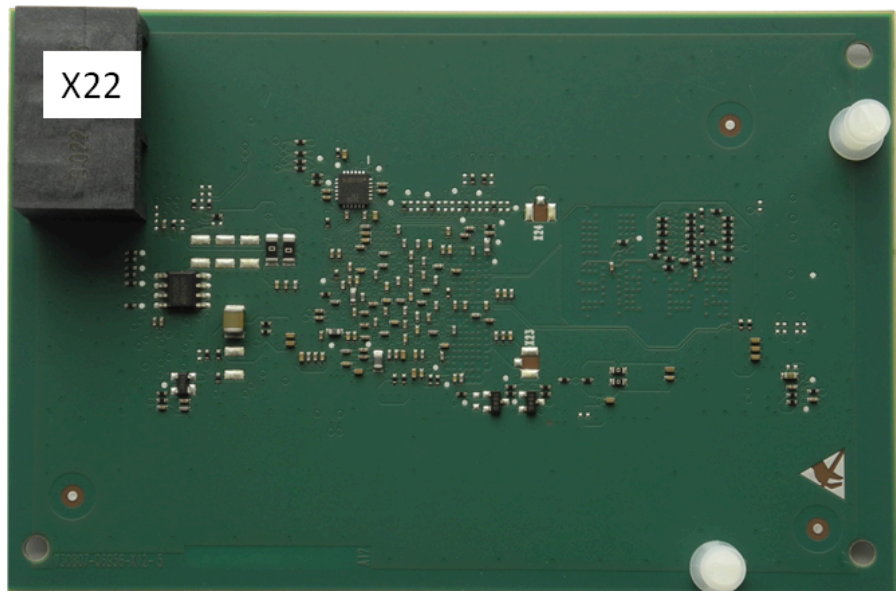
Example OCCBL – Rear side with inserted spacing bolts
